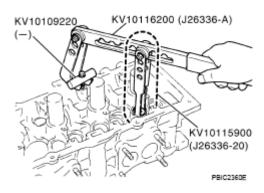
Removing Valve Collet With Valve Spring Compressor
